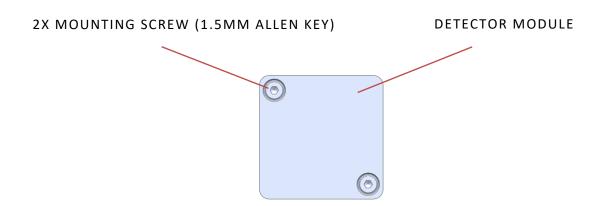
CUBE527 DETECTOR MODULE (FRONT VIEW)
